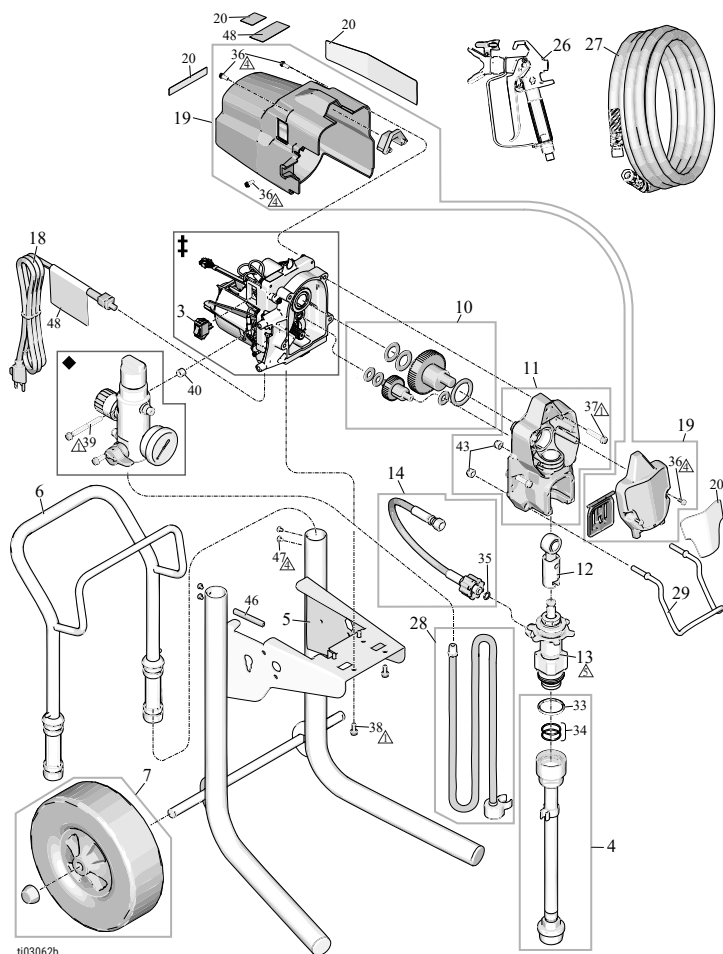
390 Hi-Cart Sprayer Parts Diagram
